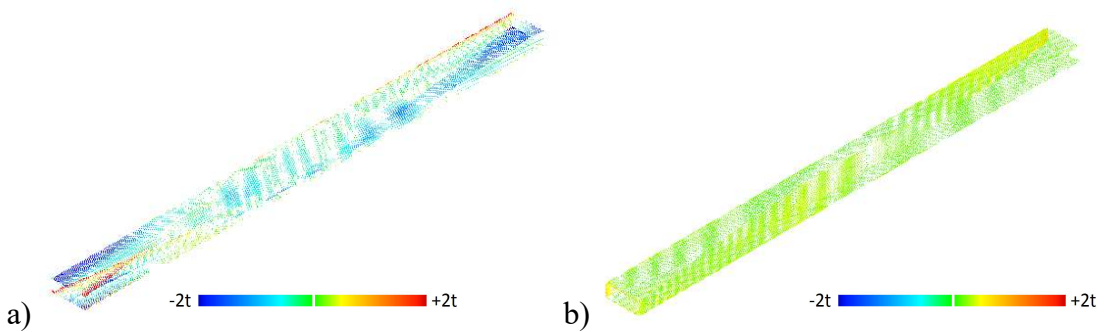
Manufacturing defect analysis. a) Surface error of steel spindle beam with $t=1.0\text{mm}$. b) Surface error of FRP-timber spindle beam with $t=7.2\text{mm}$.
